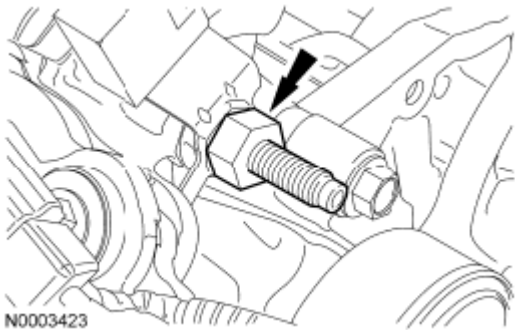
Locating Radio Ignition Interference Capacitor And Stud Bolt
